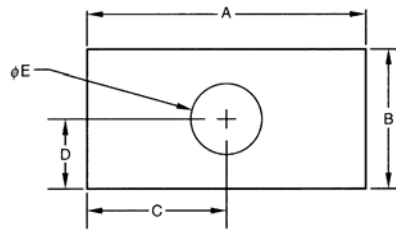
Tolerances apply to both dimensions of size (A, B, and E) and dimensions of location (C and D).
